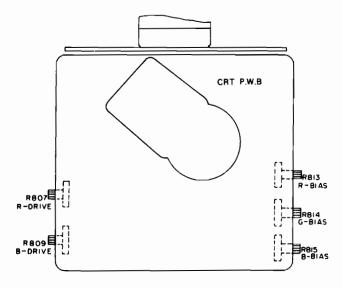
Adjustable Controls on Picture Tube Socket PCB
